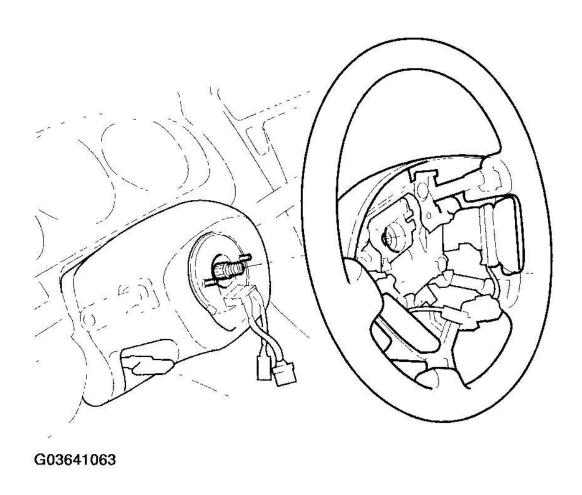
Removing Steering Wheel From Steering Column Courtesy of AMERICAN HONDA MOTOR CO., INC.
